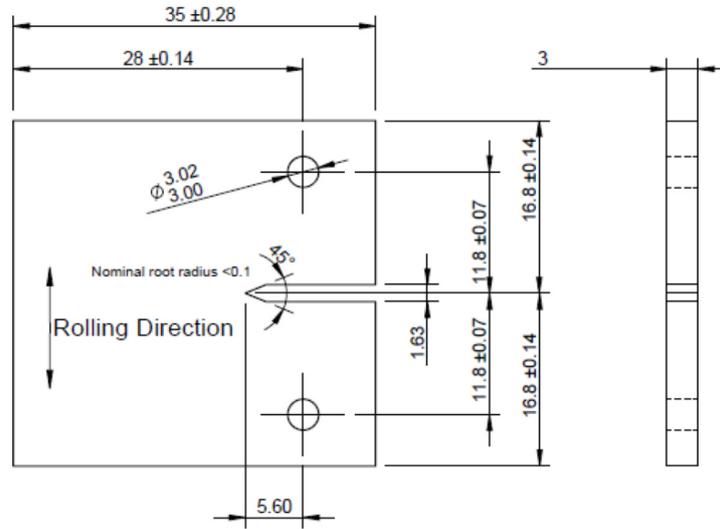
Dimensions (in mm) of specimens used for in-situ SEM testing. Specimens were cut from a sheet of aluminium alloy 6082-T6.
